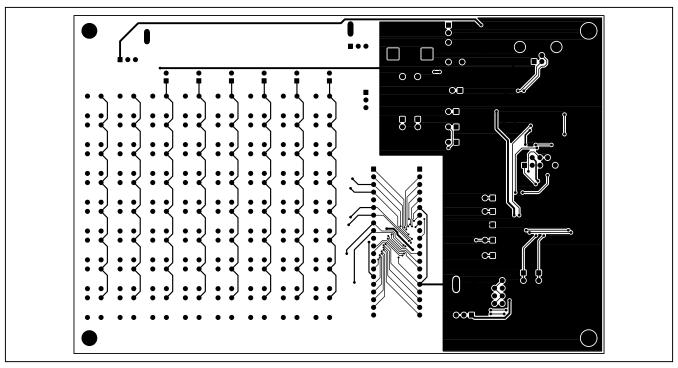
MAX7360 EV Kit PCB Layout—Solder Side
